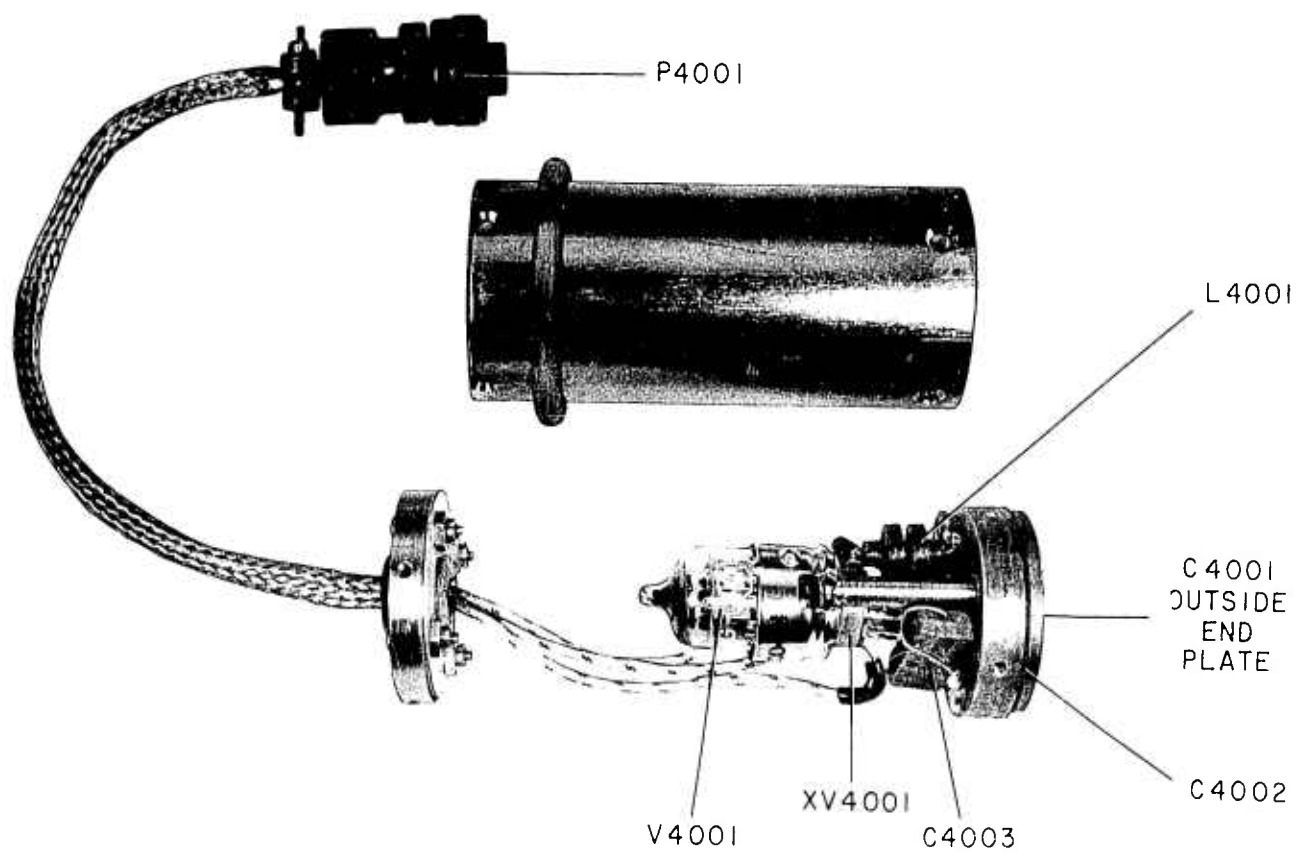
B. Plate RF Voltmeter Probe Z504, Shell Removed.
